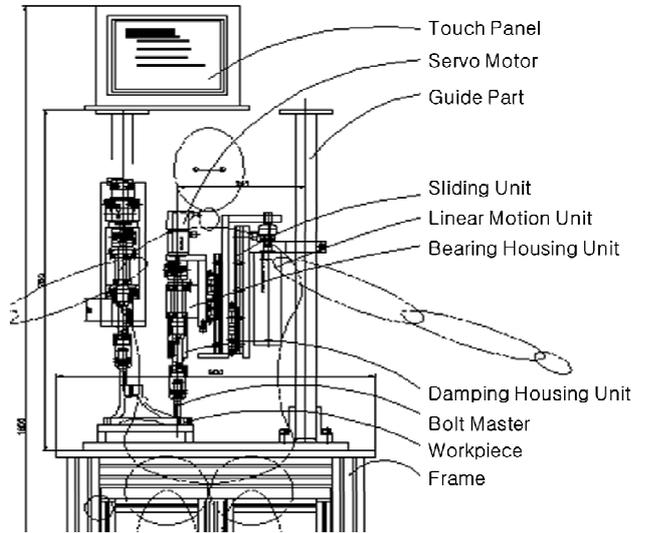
Overall scheme of inspection system for tapped part
